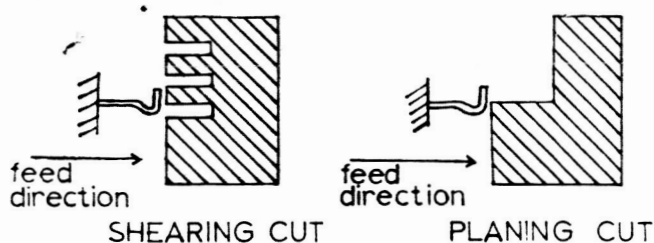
Sketch of specimens used to obtain the shearing and planing components of longitudinal energy.
